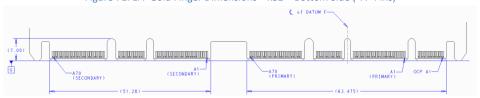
LFF Gold Finger Dimensions - x32 - Bottom Side ("A" Pins)
